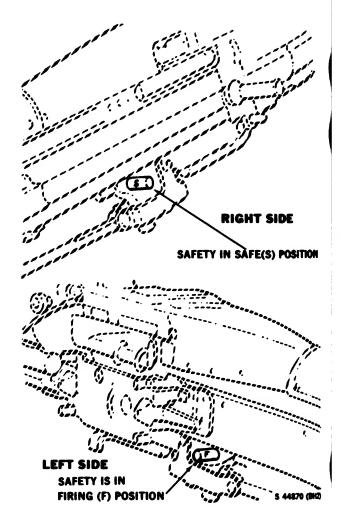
Location and Identification of Safety on Machinegun M60D
